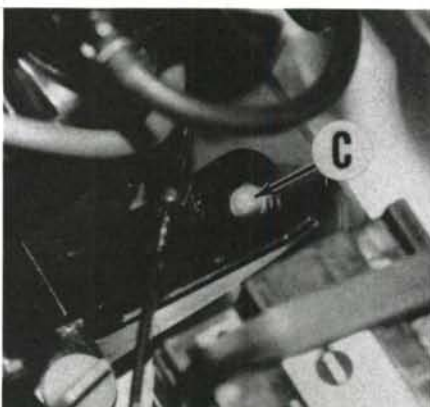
Cap screw (C) and washer on each side of front and rear engine crankcase mounts retains engine assembly to engine bases.
